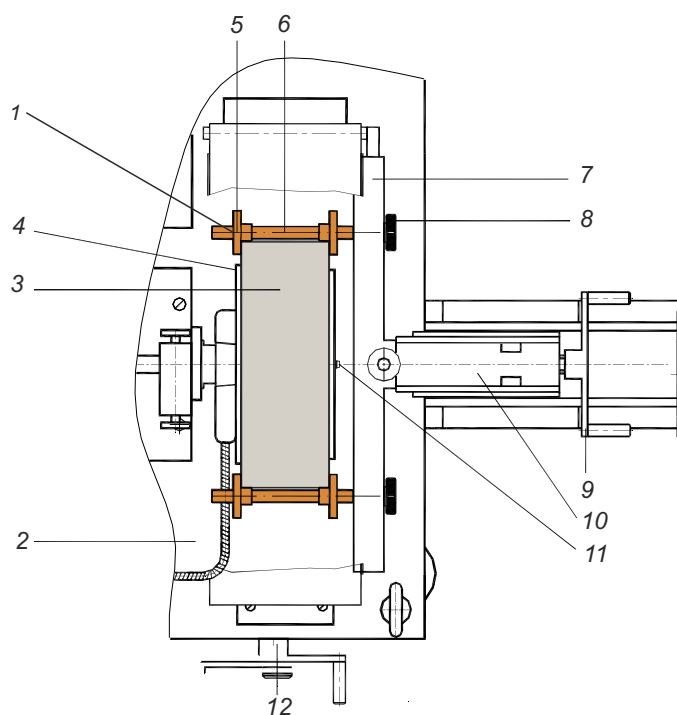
Schematic mounting diagram of flangeless roller bearing holding fixture (top view)
